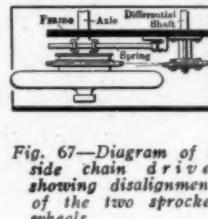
Diagram of a side chain drive, showing disalignment of the two sprocket wheels.
